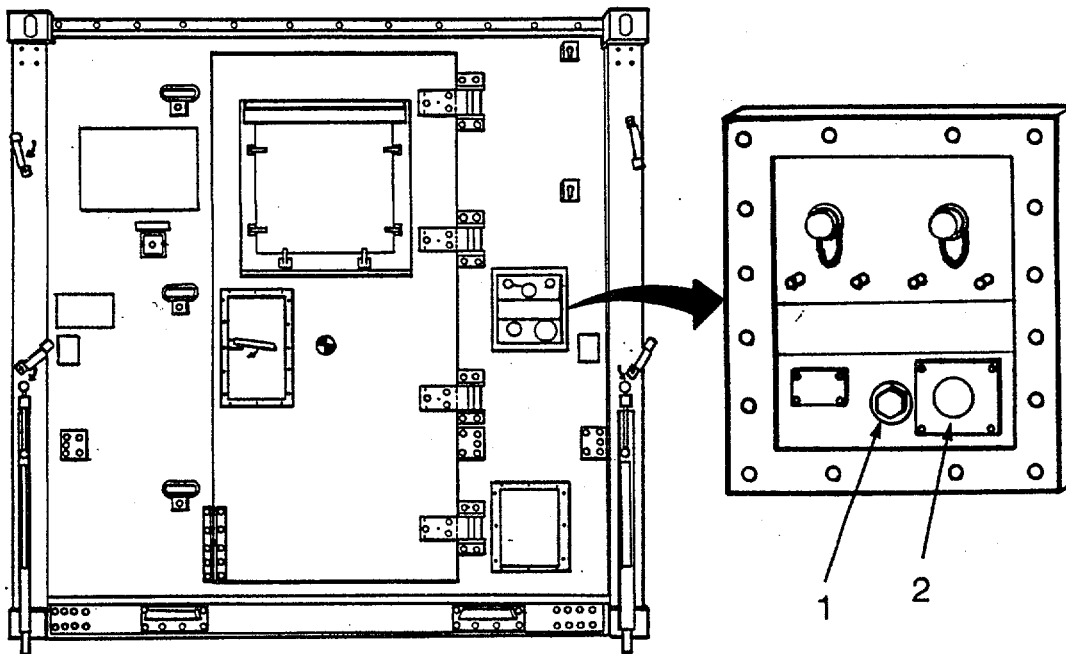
Power Cable Connections to Finishing Section Shelter
